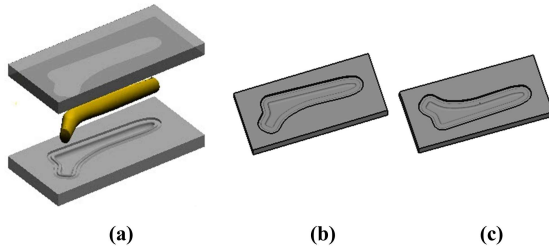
(a) Hip joint implant forging die and forging preform, (b) lower die, and (c) upper die.
